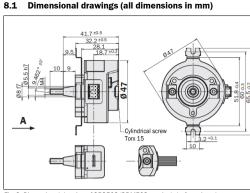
Dimensional drawing of SRS50S/SRM50S, conical shaft, spring plate
